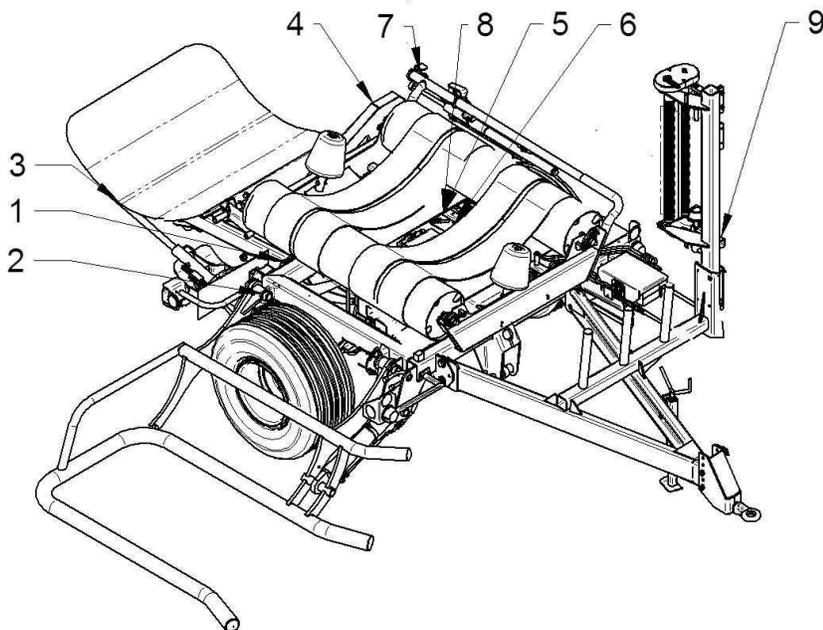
Lubrication points in the bale wrapping machine SIPMA OS 7521
